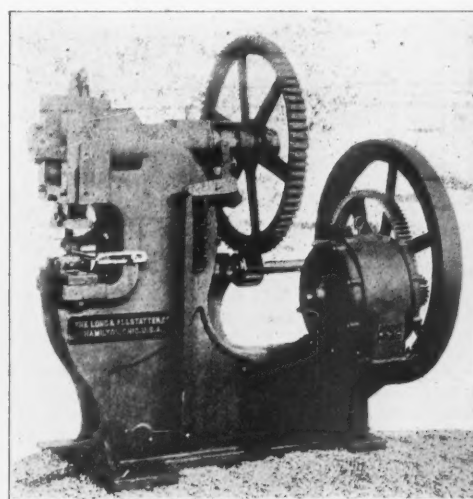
Punching Machine Gear Driven From Constant Speed Motor.
